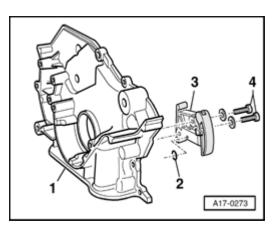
Unscrewing/Screwing Bolts And Removing/Installing Chain Tensioner From Front Sealing Flange
